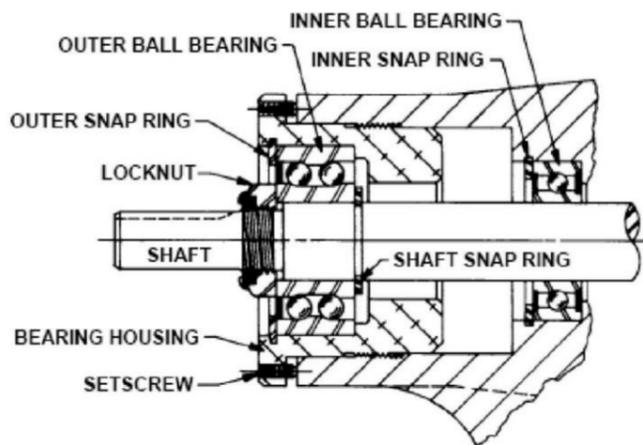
Thrust bearing assembly G-GG, G-HJ and G-HL models.
